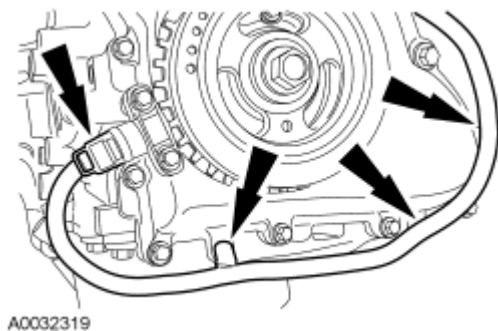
Locating CMP Sensor Electrical Connector & PCV Hose
